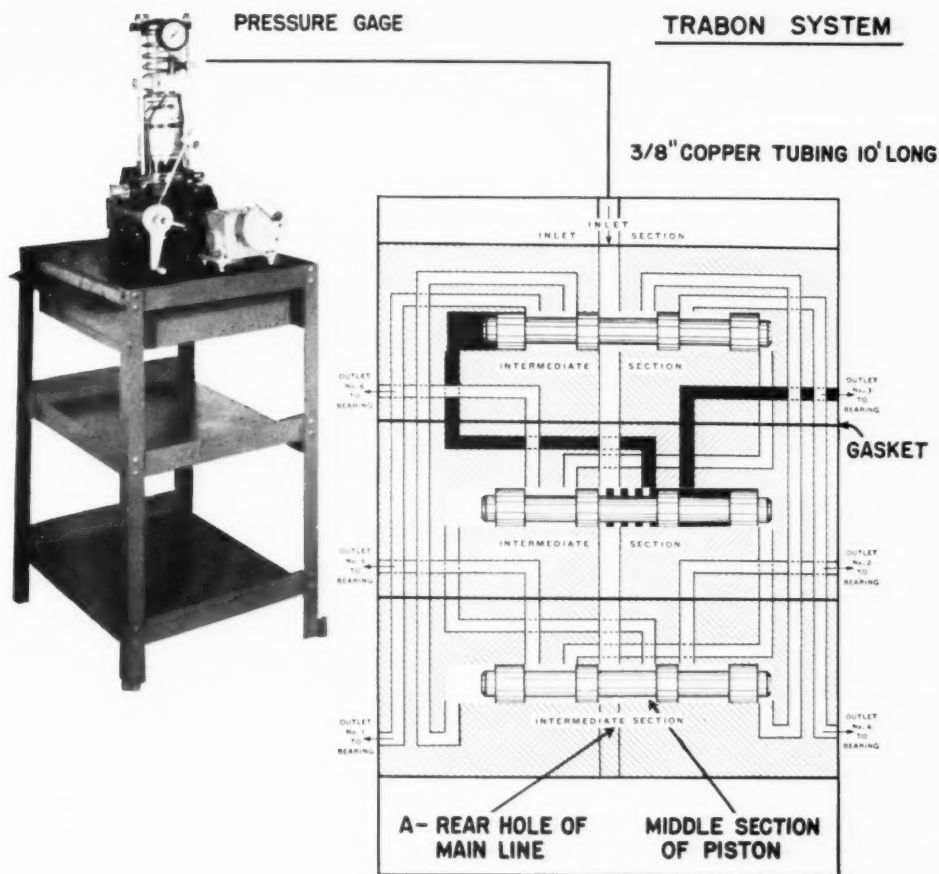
Arrangement of Trabon Centralized Test Unit consisting of Trabon pump and header block. At left is shown entire pump assembly on test table. On the right is cross-sectional view of the header block.
